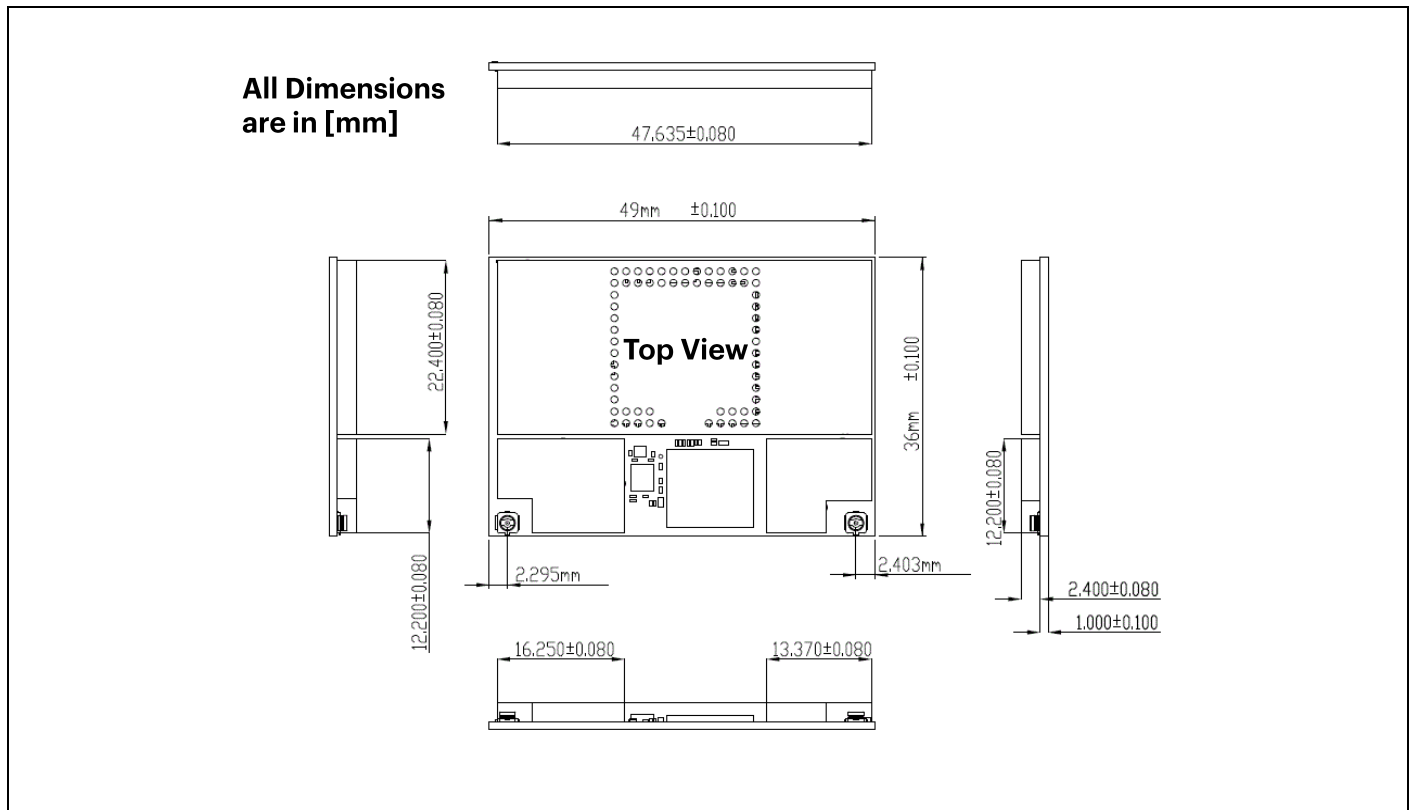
ARTIK 530 Module Mechanical Dimensions Top View
